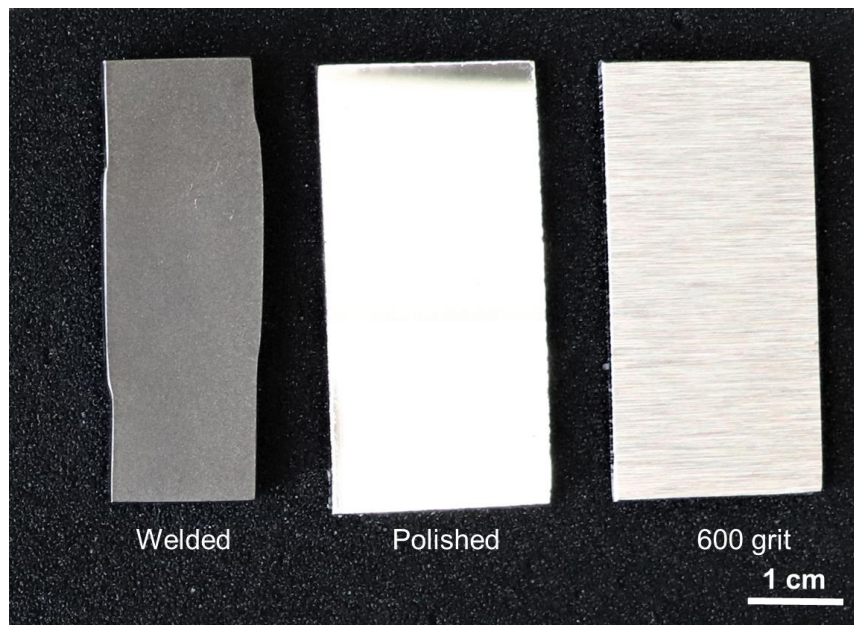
Examples of the welded, polished, and reground (600 grit) coupons used in the STL experiments.
